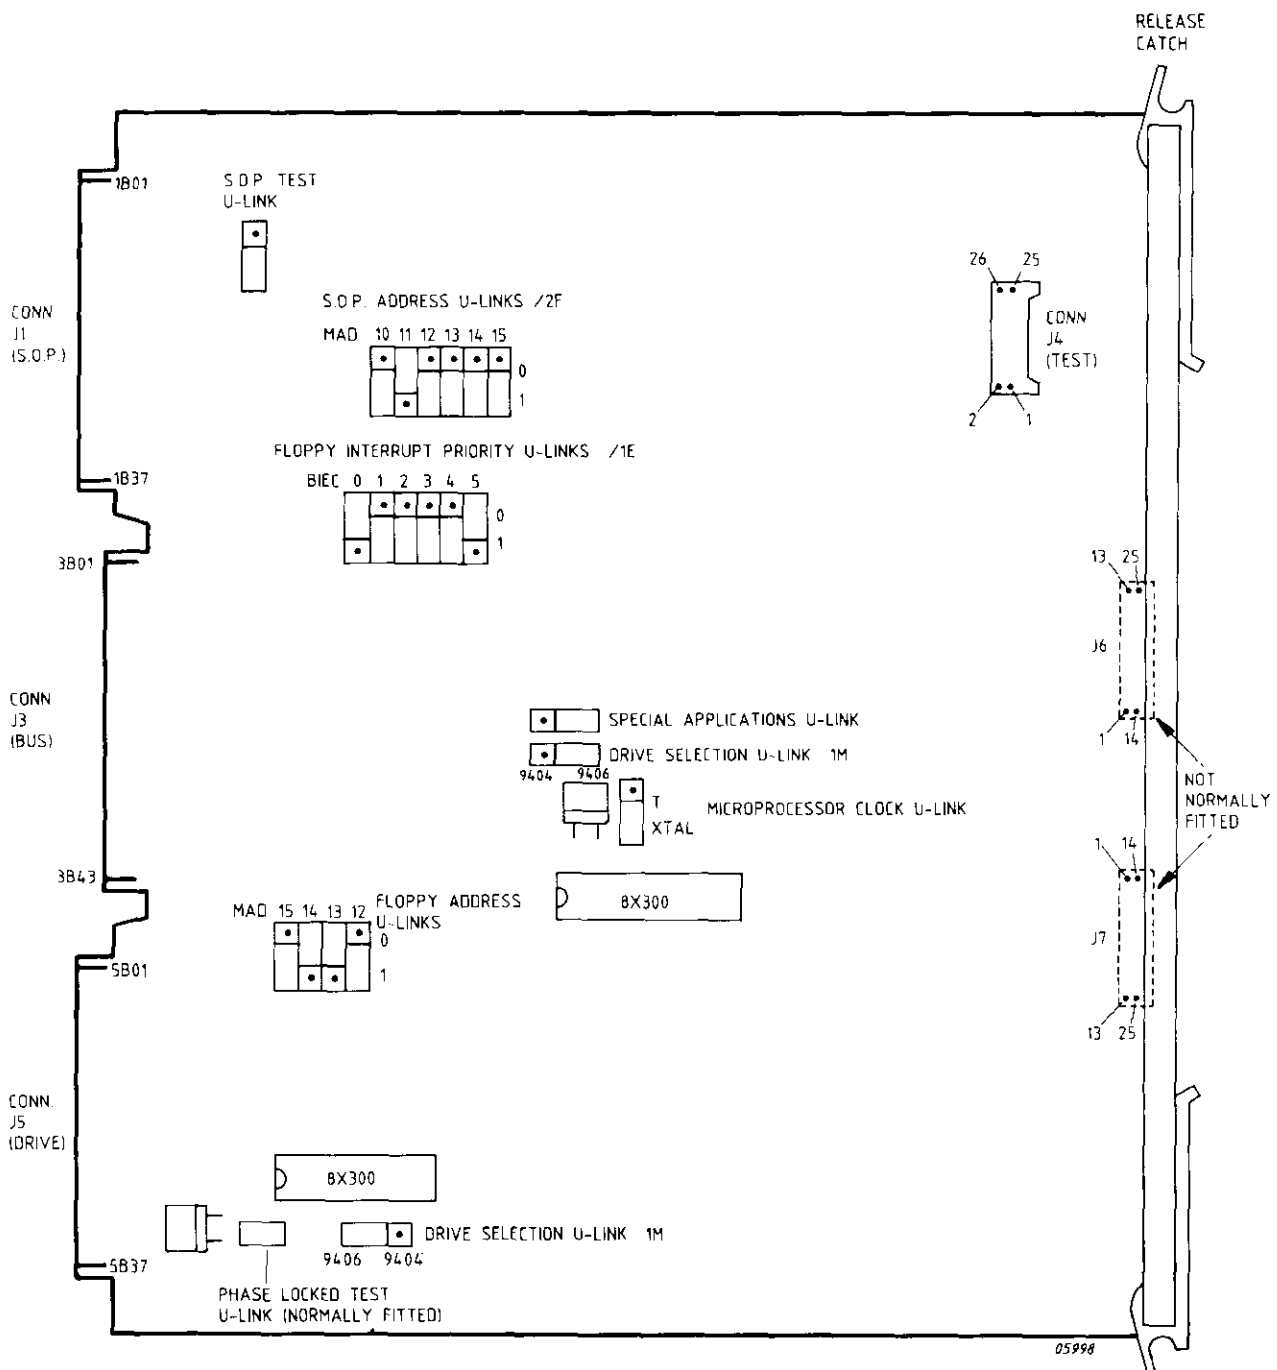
LAYOUT OF F1MB CARD WITHOUT ADDED PCB
